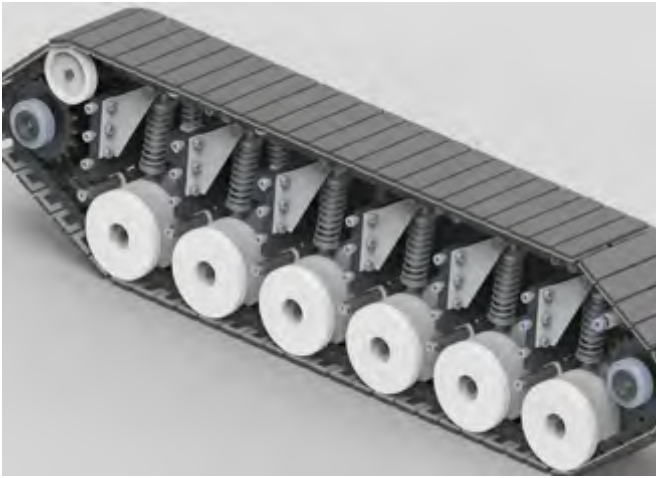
Rendered side-view of R.A.U.D.I.'s suspension system with disassembled side mounting plate and cover sheet.
